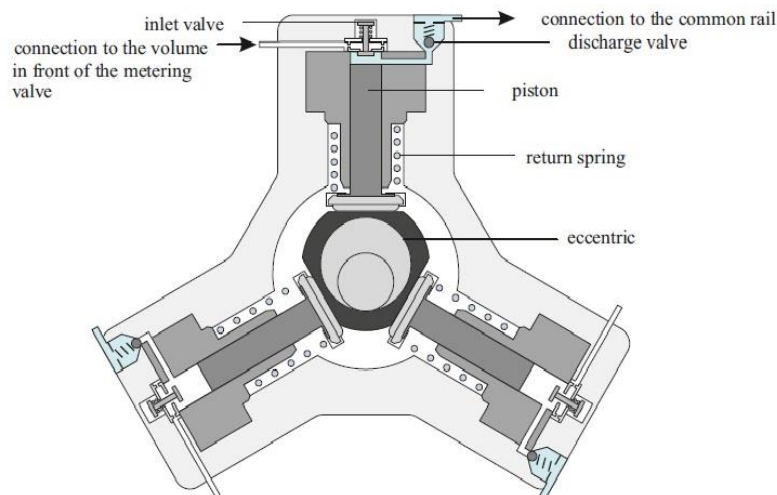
Sectional view of the 3-cylinder radial piston pump CP1H by Bosch.
